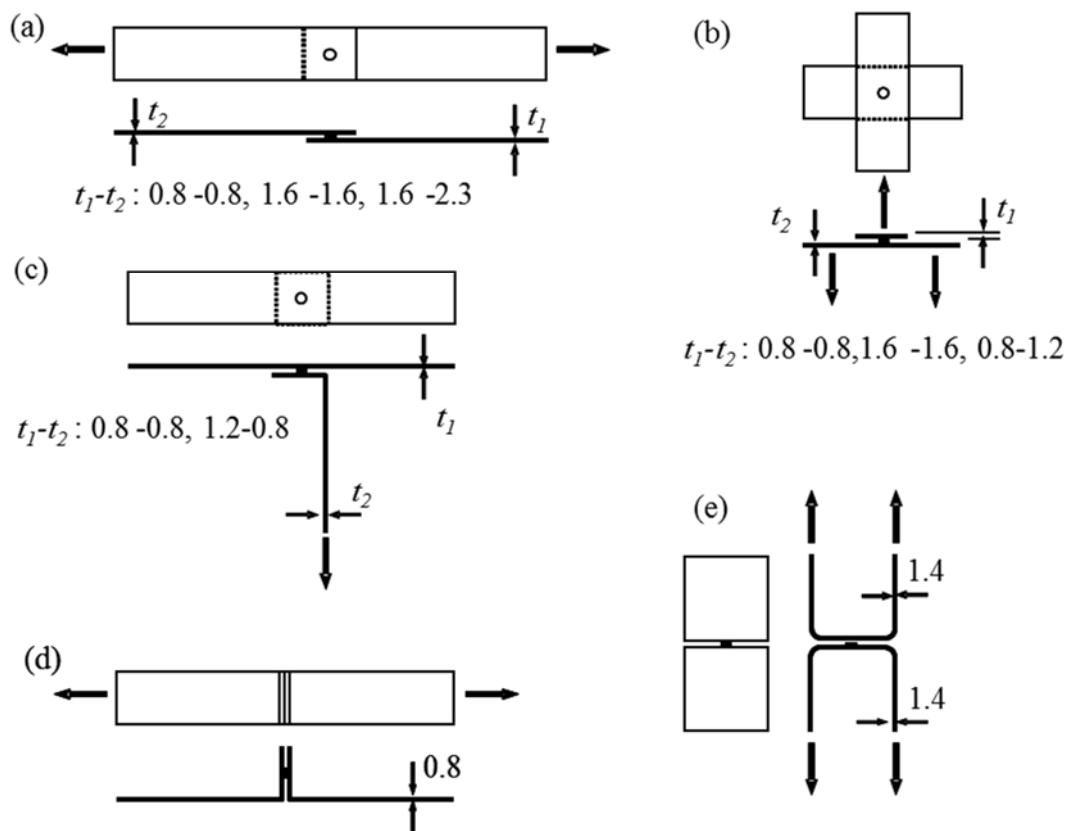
Single spot welded specimens. (a) Tensile shear (TS), (b) cross tension (CT), (c) T-type tension (TT), (d) L-type tension (LT), (e) U-type tension (UT).
